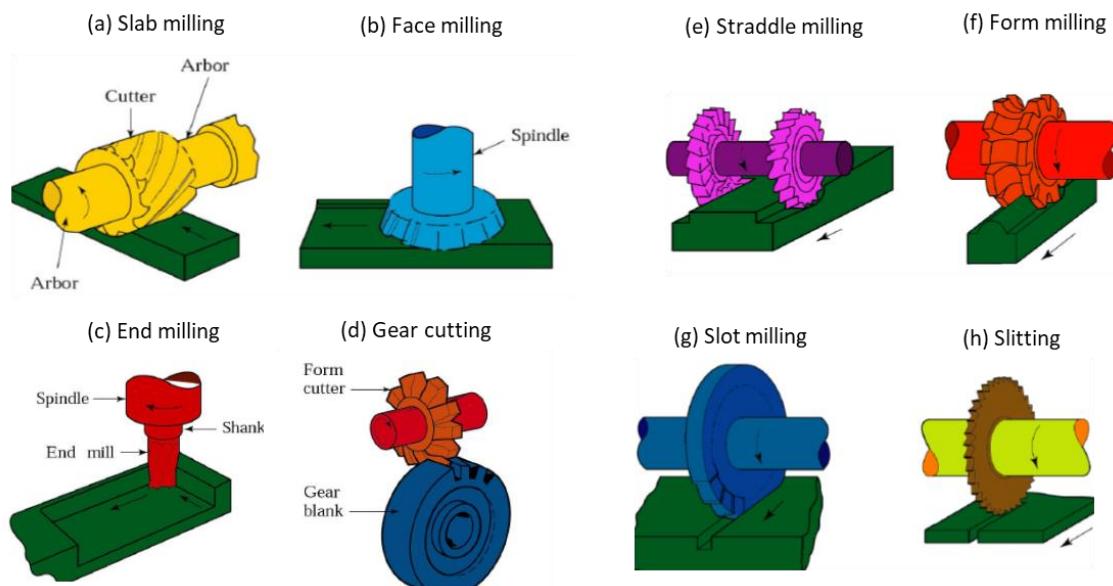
Schematic of some possible machining operations on the milling machine. Figure source: Kalpakjian and Schmid's book
